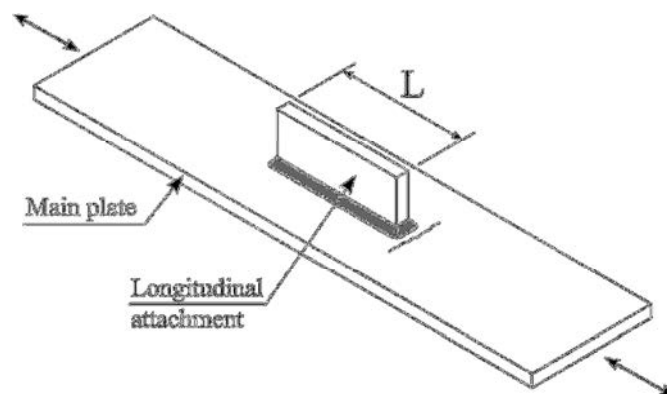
Fatigue crack location and stress direction of longitudinal welded attachments
